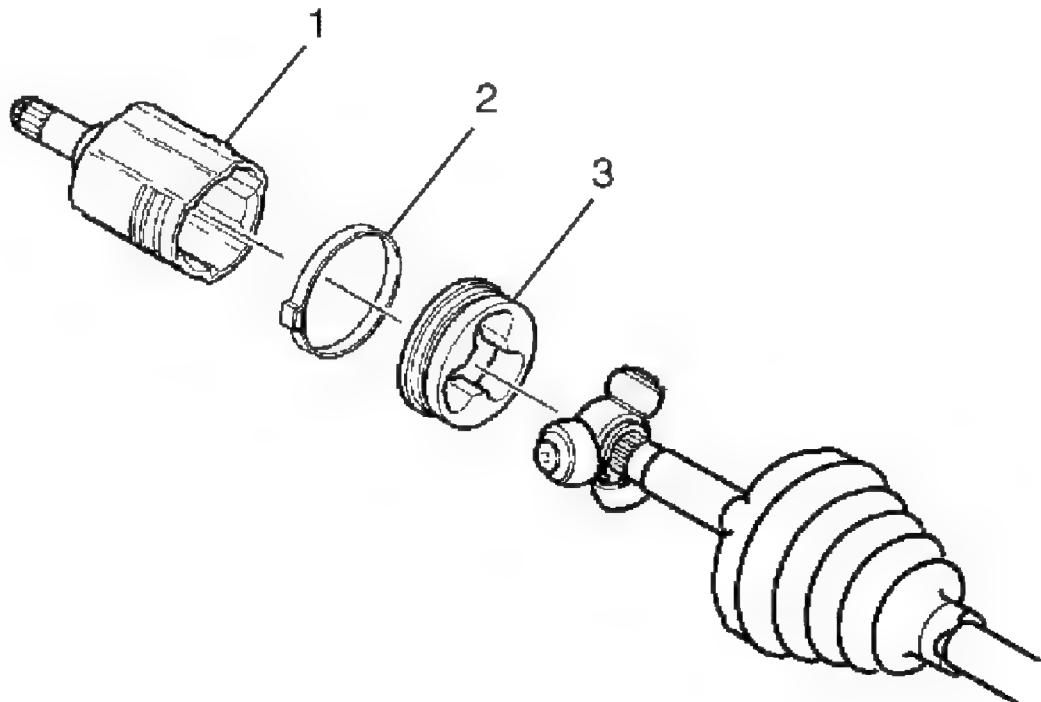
Seal Retaining Clamp, Tripot Bushing & Housing
